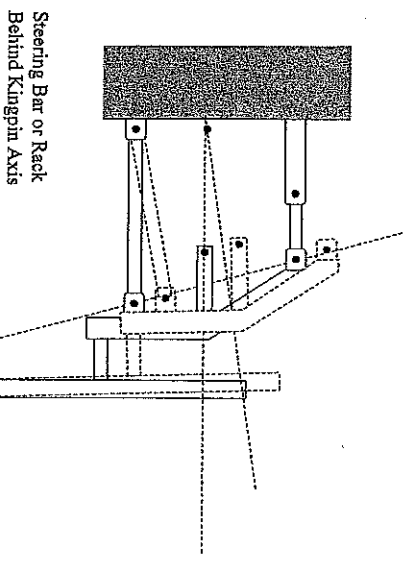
Adjusting the rod length to minimize bump steer steering knuckle behind front axle.
